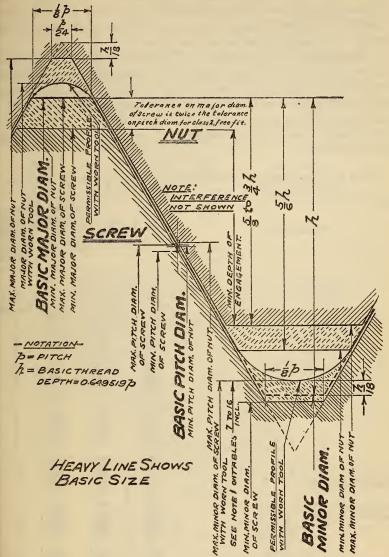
Illustration of tolerances, allowance (interference), and crest clearances for class 4, close fit
